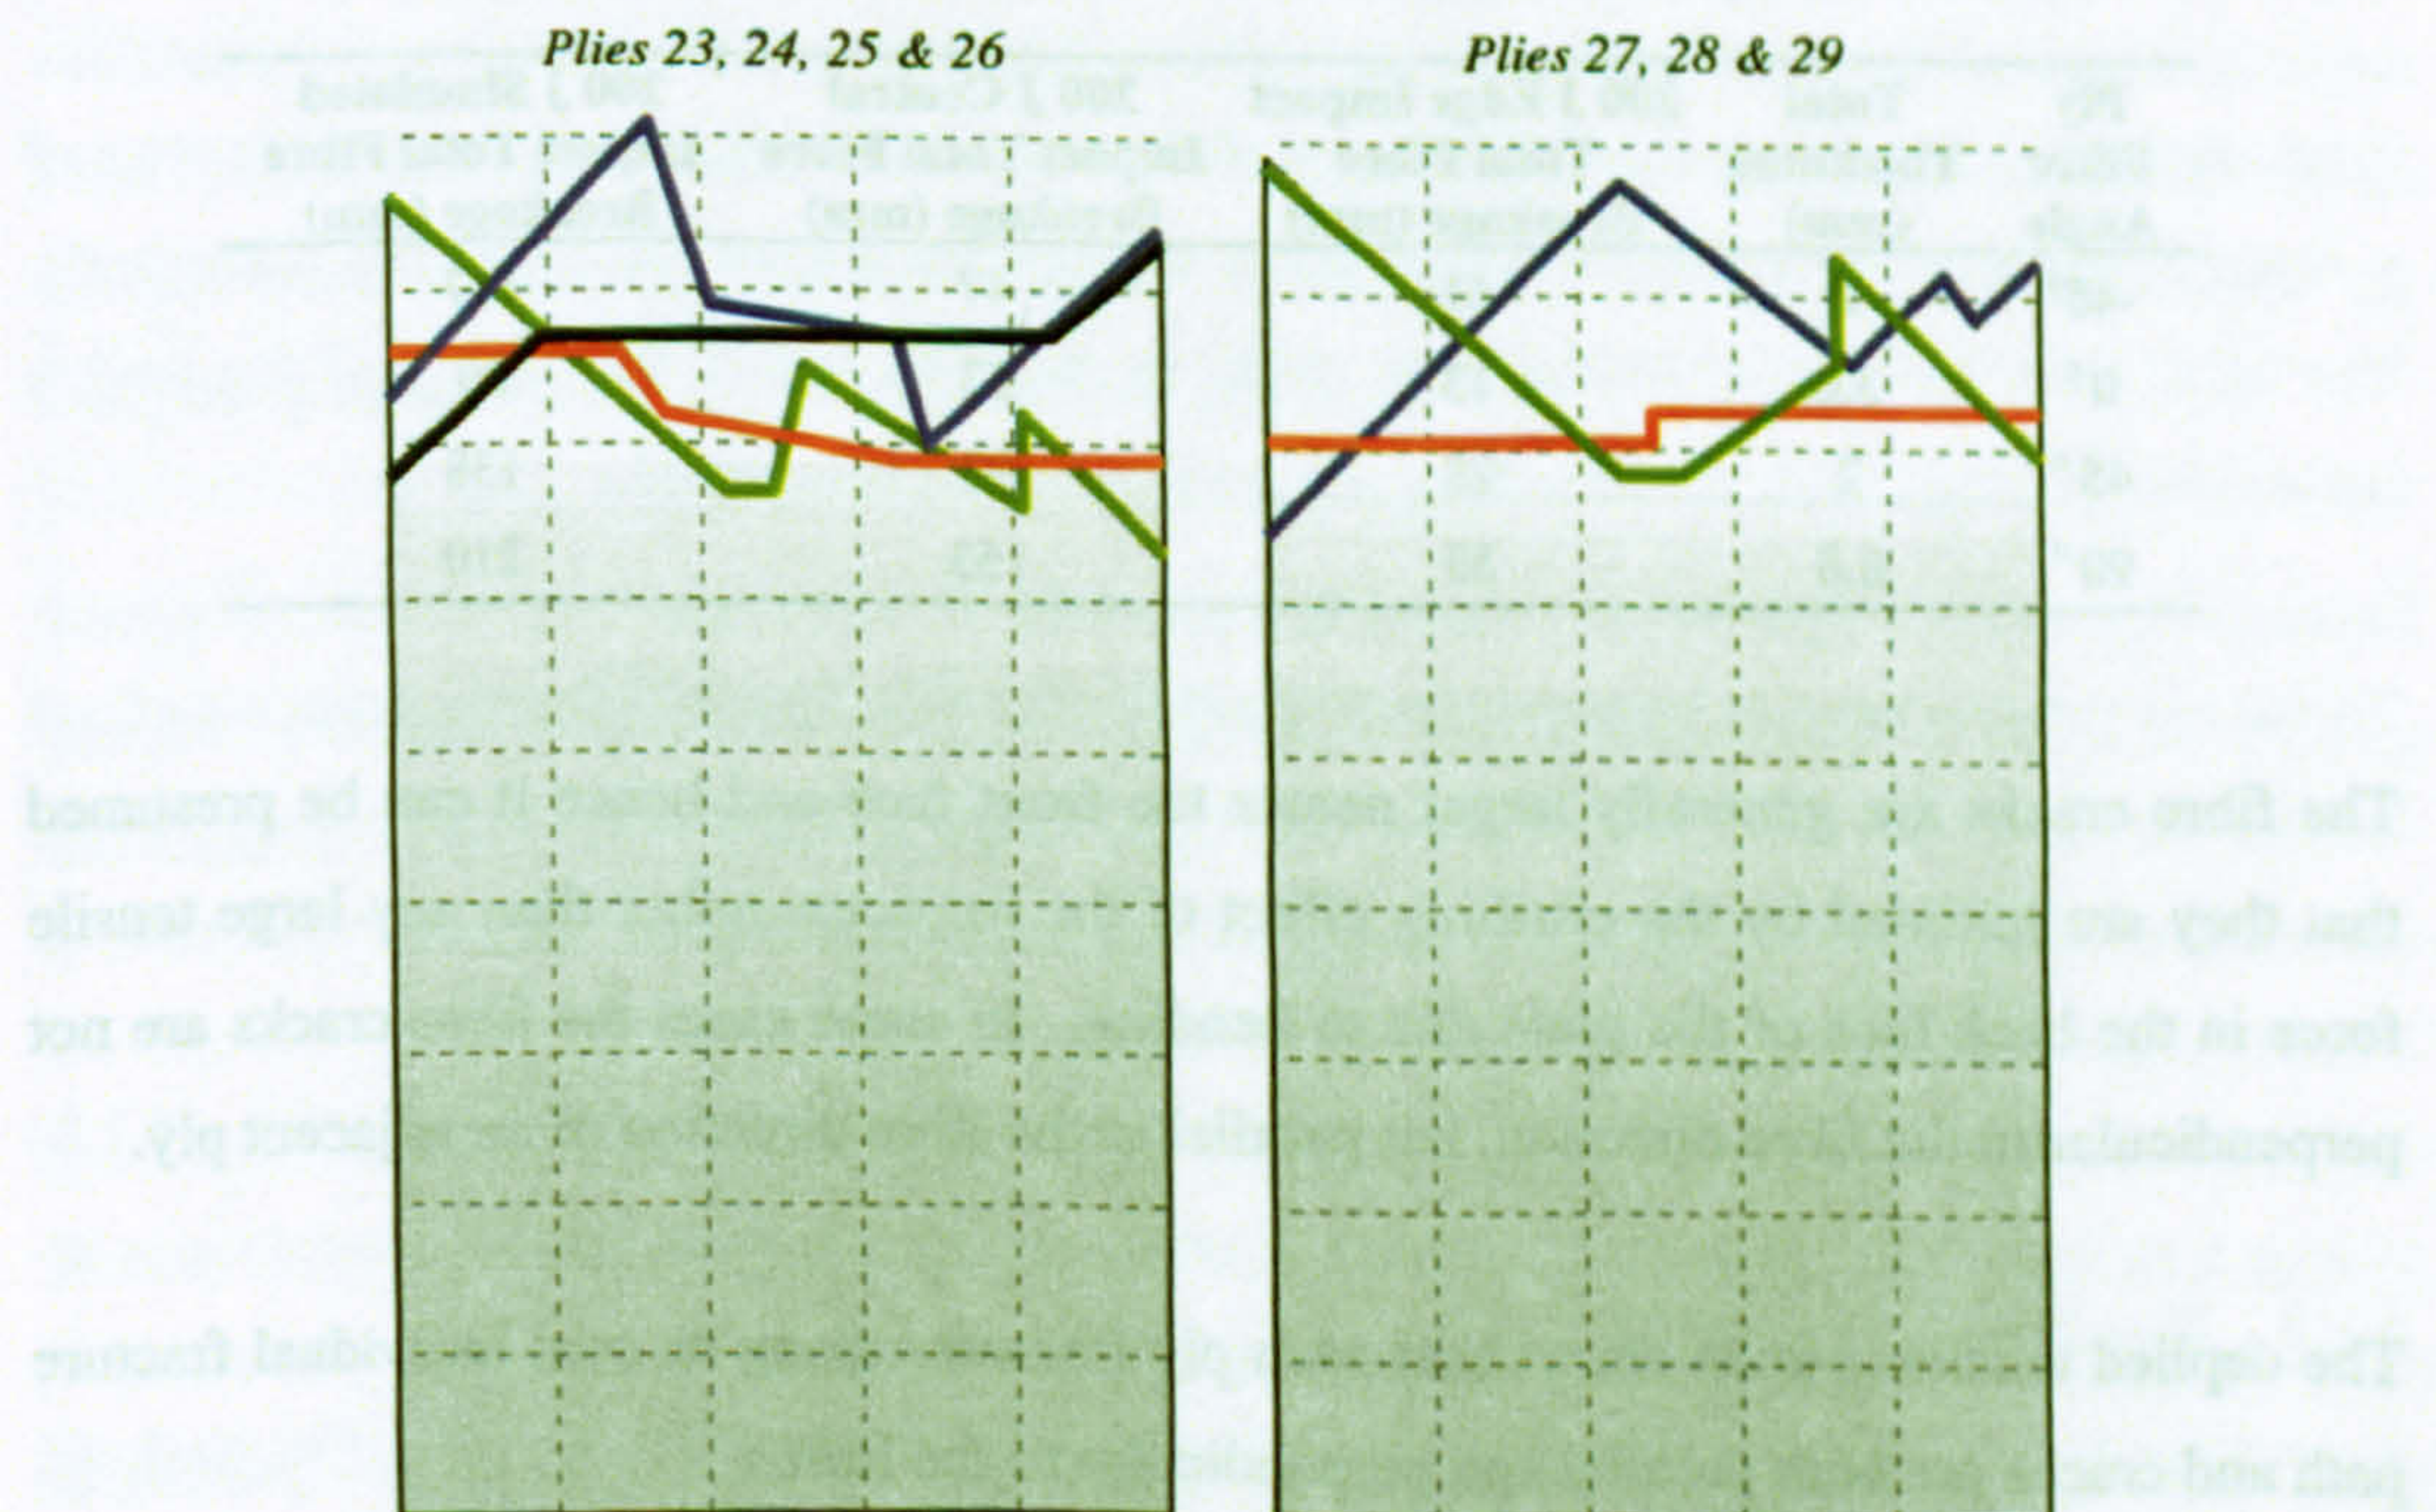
Plies 23 - 29 showing the fracture surfaces of one half of a failed 8 mm thick tensile coupon with 375 J central impact damage (10 mm grid spacing)
